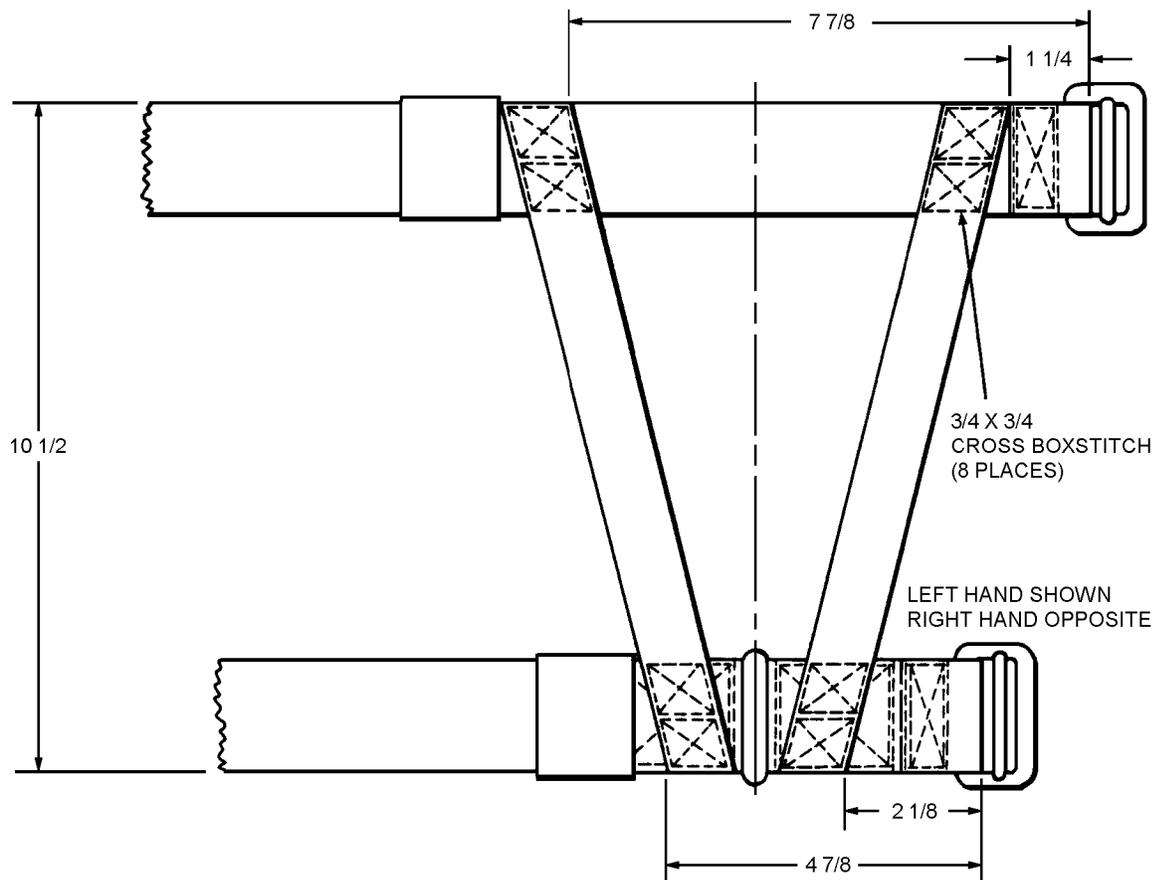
Connecting Straps Attachment to Upper and Lower Straps
